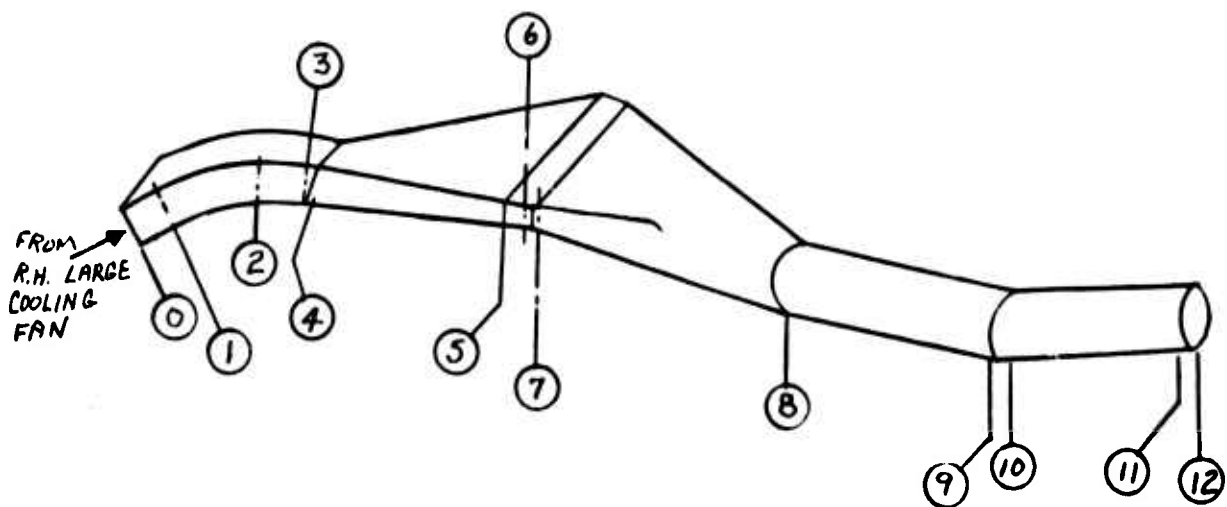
Cooling Air Duct Definition - R.H. Large Cooling Fan to Center Fuselage
